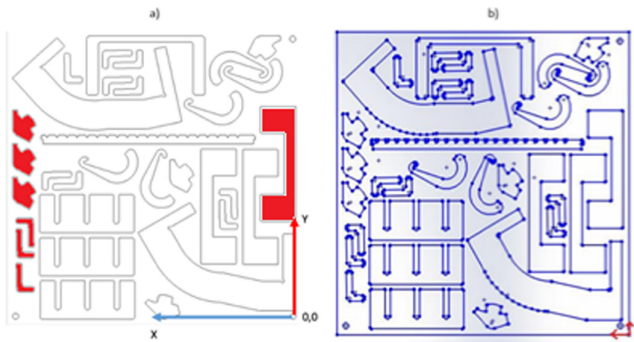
Laser cut metal sheet: a) not detachable parts are colored with red color; b) CAD view of the metal sheet (Color figure online)
